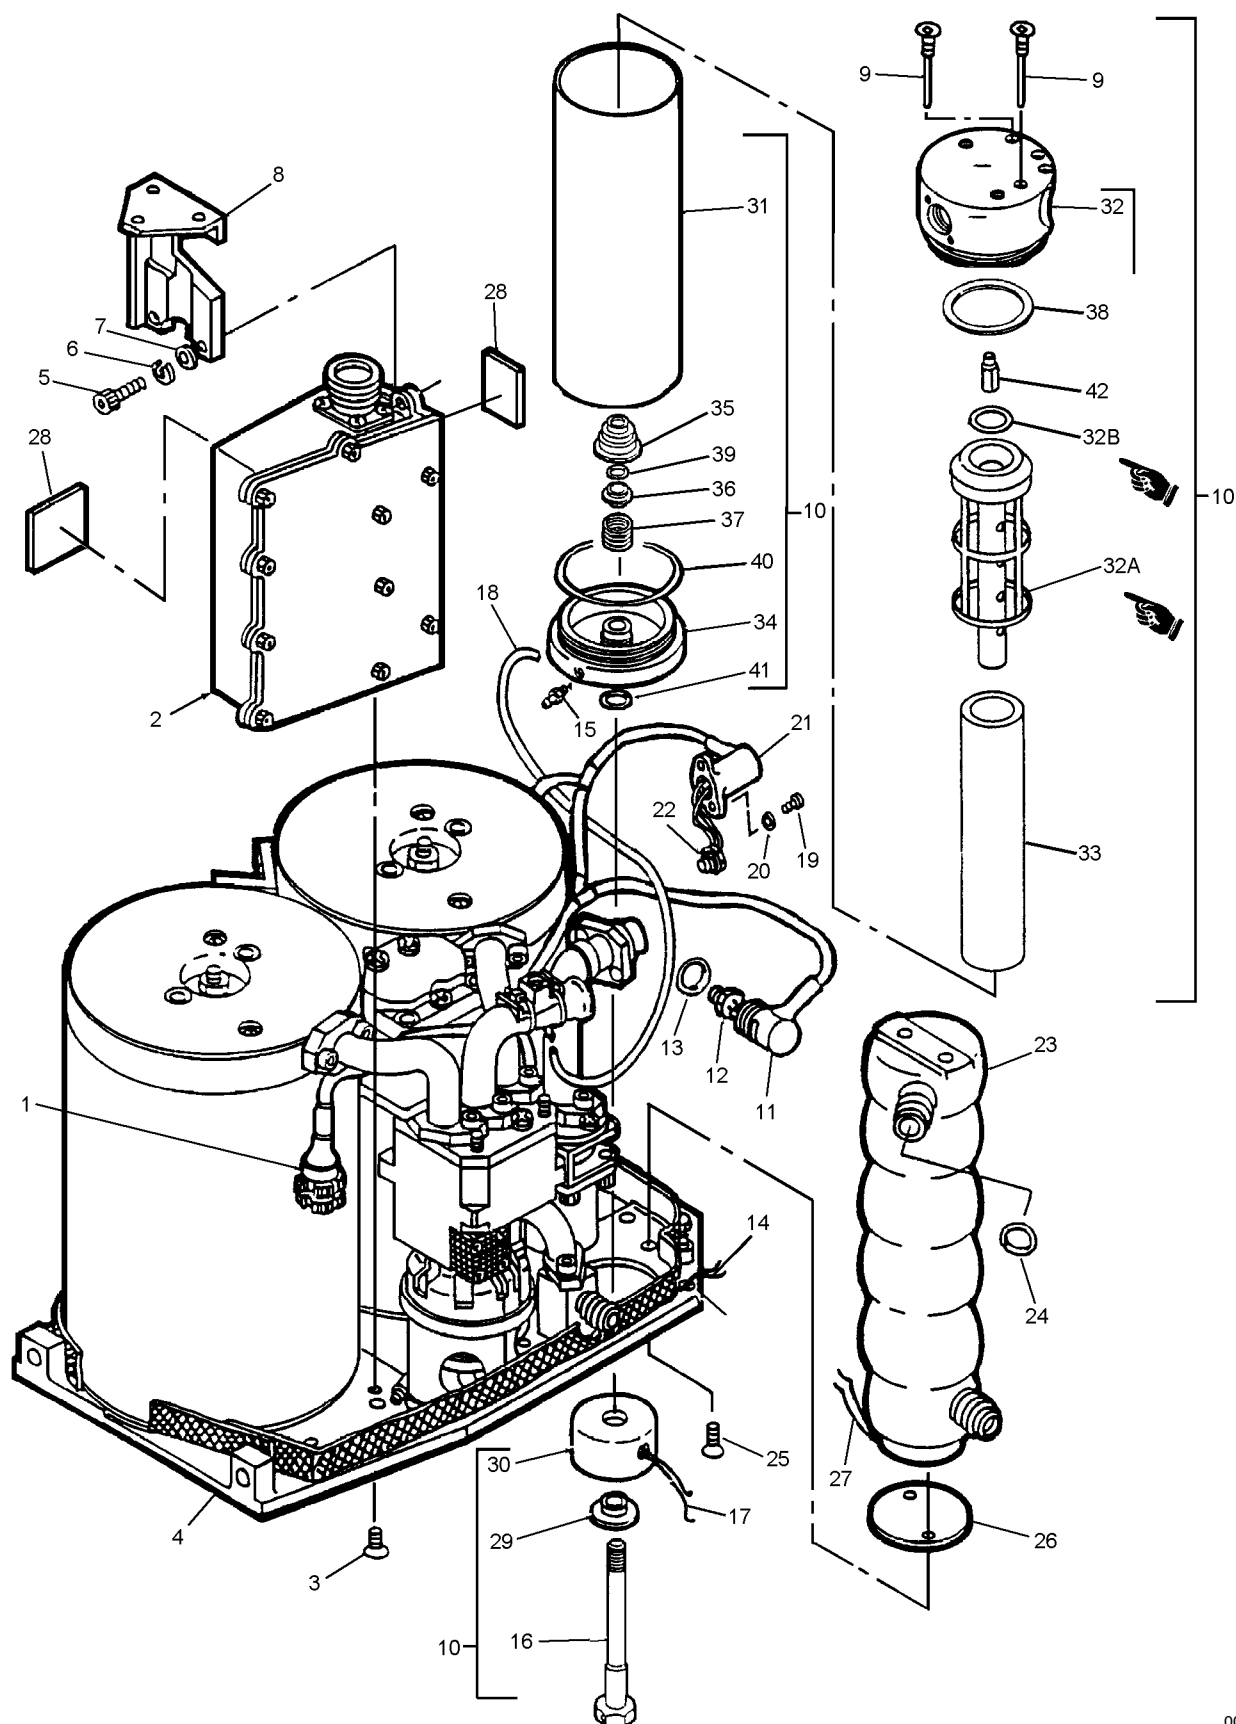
Plenum Assembly/Oxygen Fitting Removal/Assembly
